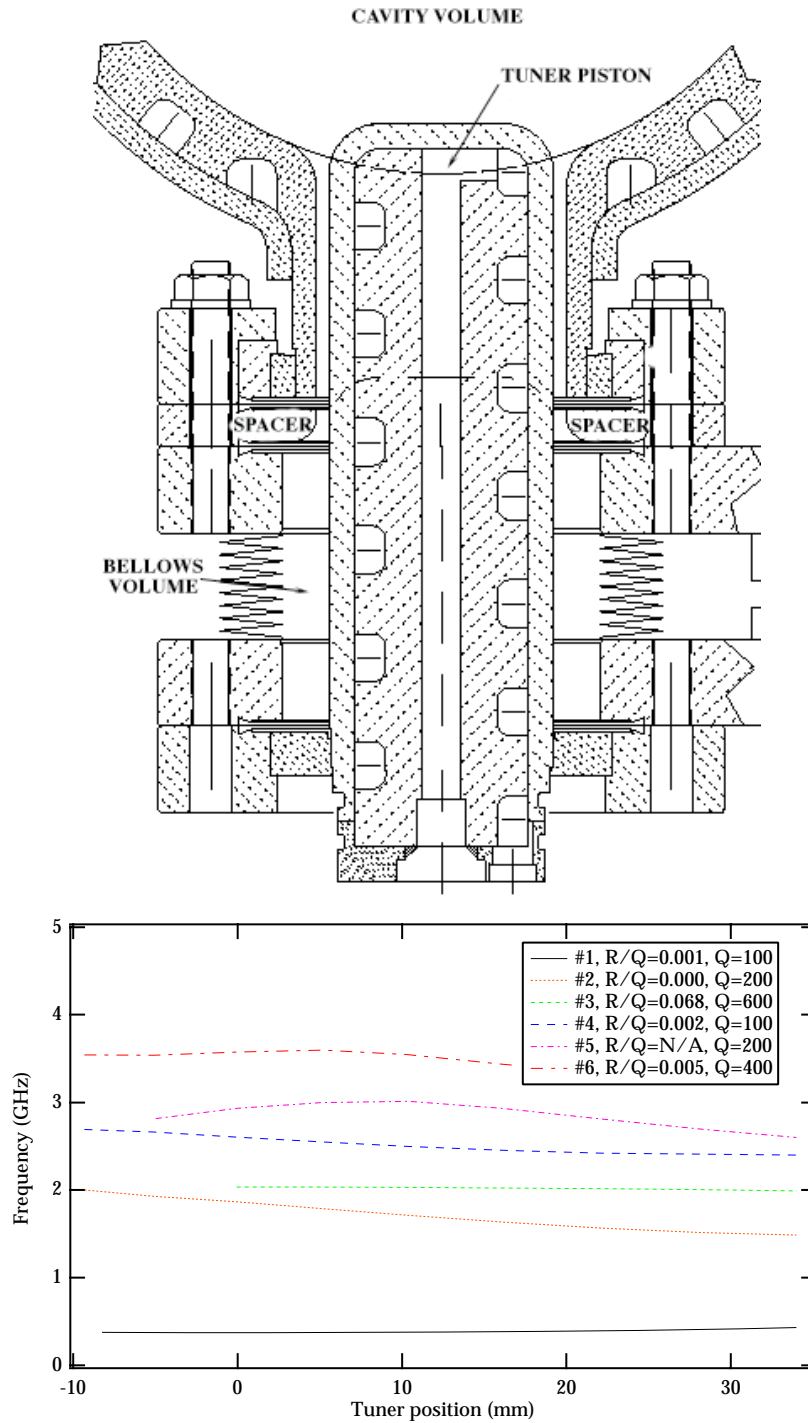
Top) Mechanical drawing of the tuner bellows assembly. Bottom) Frequency dependence of the tuner resonances with tuner position with an 8.6 mm spacer added to the bellows assembly.
